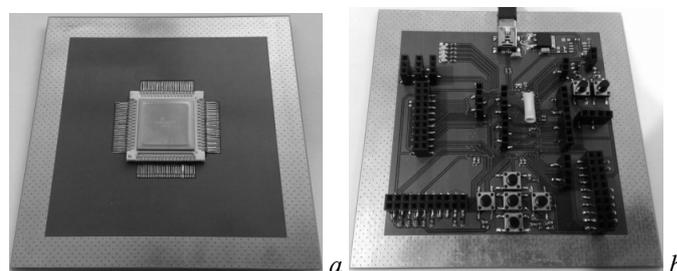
PCB with IC and peripheral equipment, top (*a*) and bottom (*b*) views
